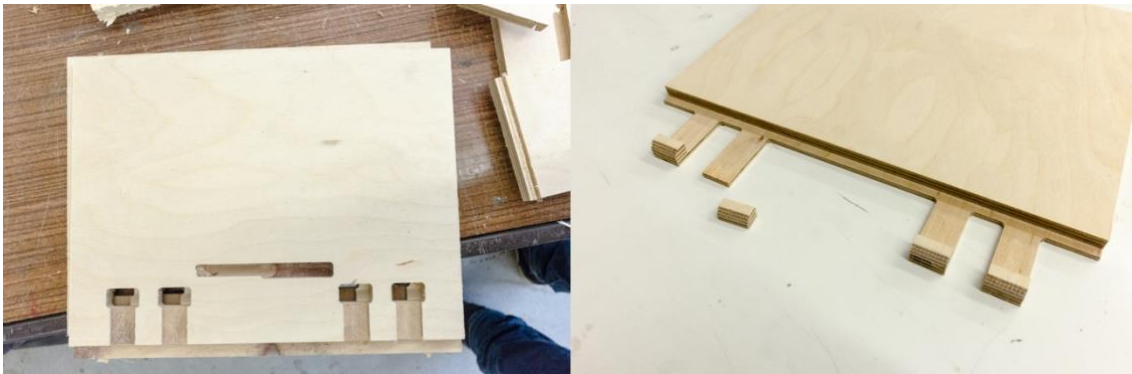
Modified Snap-fit design. Assembled wall section (left) and parts for cutting (right)
